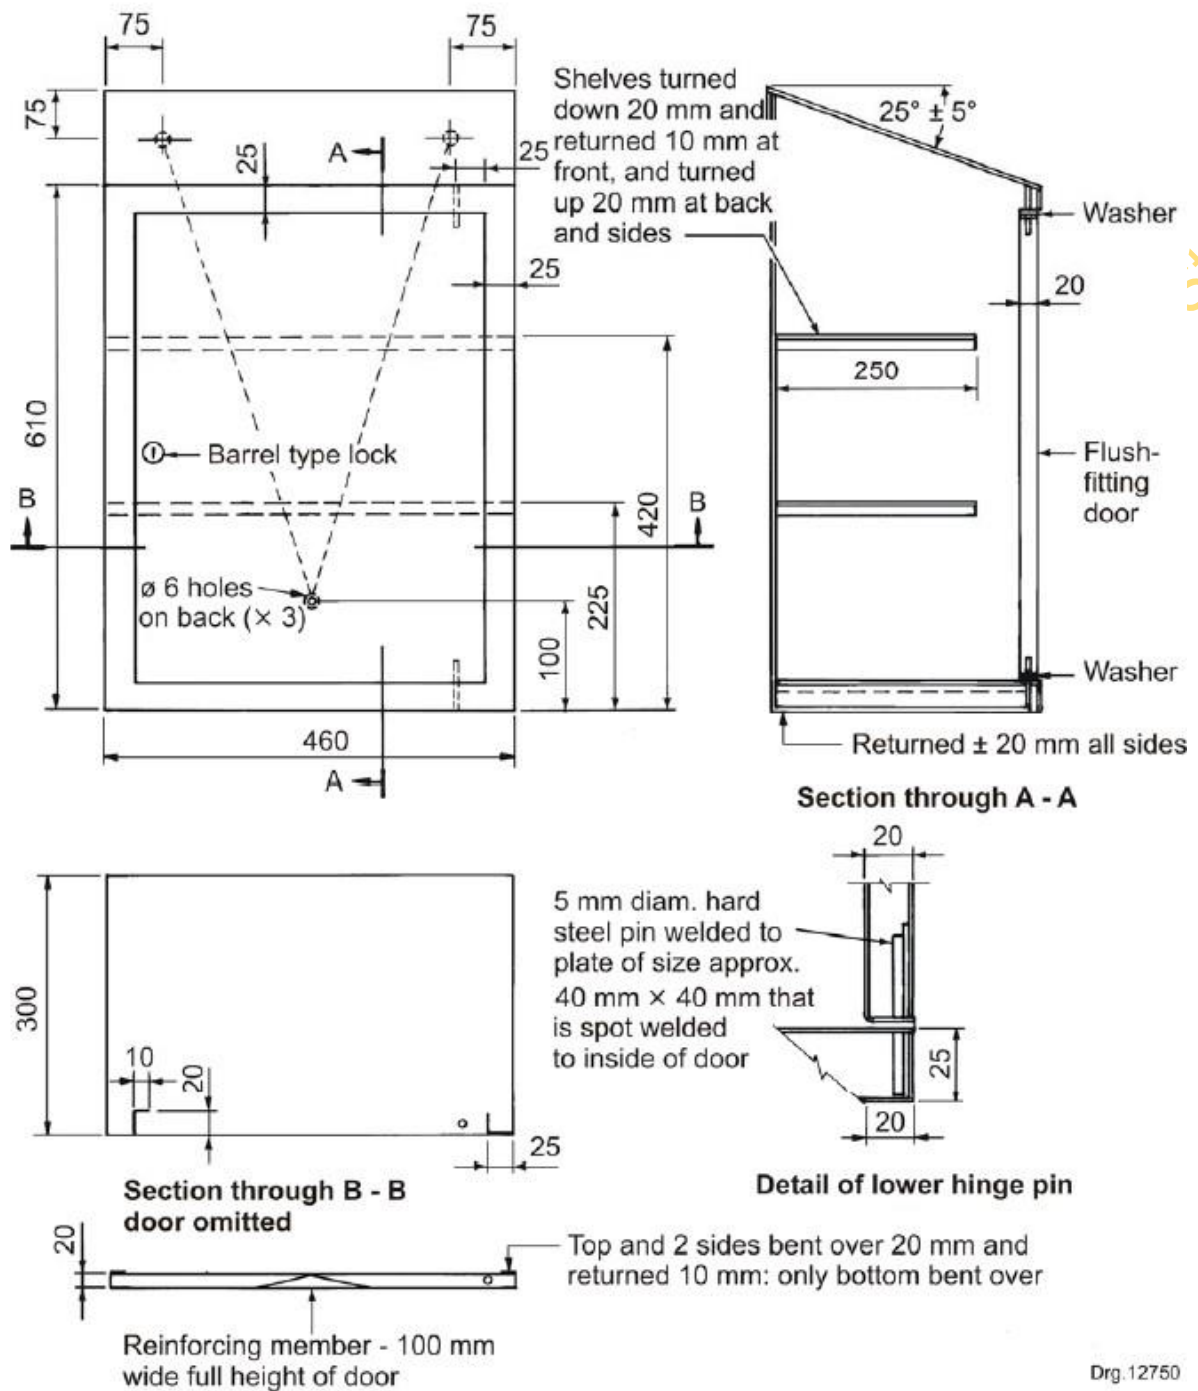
Type C steel drug cabinet (Medium-sized wall-mounted type) illustration
